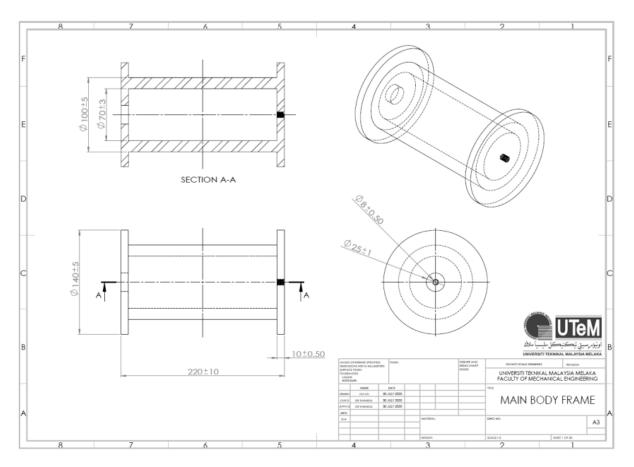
The dimensions in millimeters of the main body frame (roller) in multiple views.
